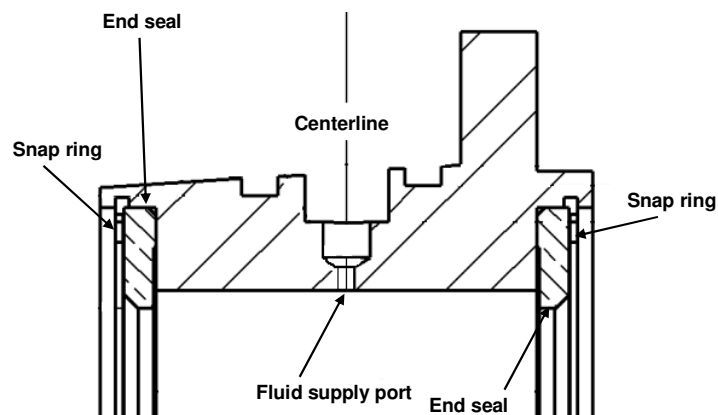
FPB section view showing end seals and supply ports, pad length between seals = 38.1 mm (1.5 in).
